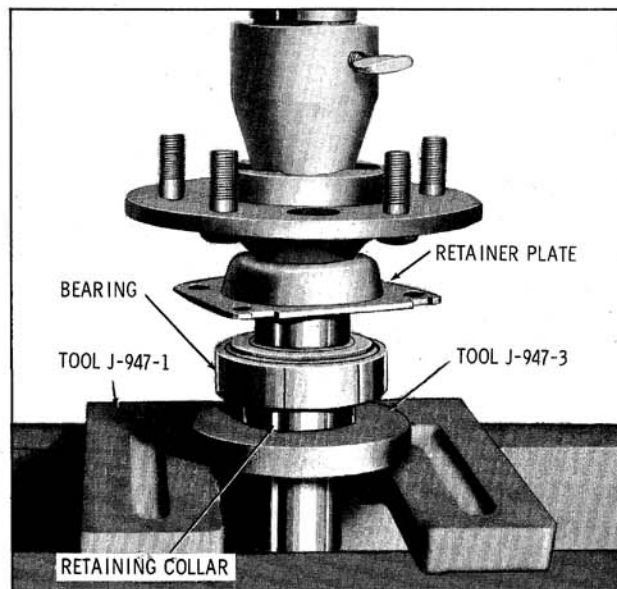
Installing Axle Bearing (54 through 86 Series)
